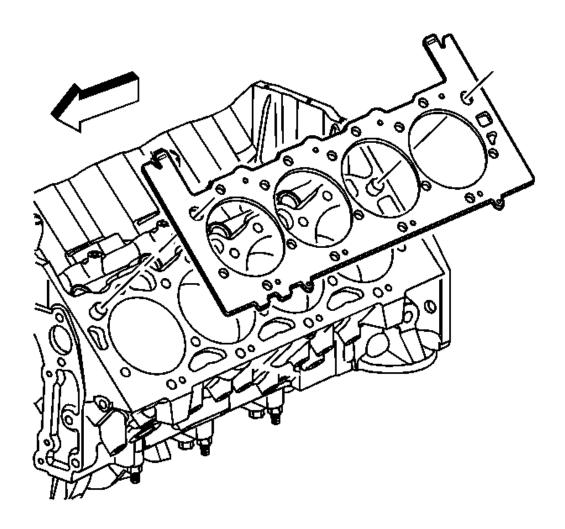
View Of Left Cylinder Head Gasket And Alignment Pins Courtesy of GENERAL MOTORS CORP.
